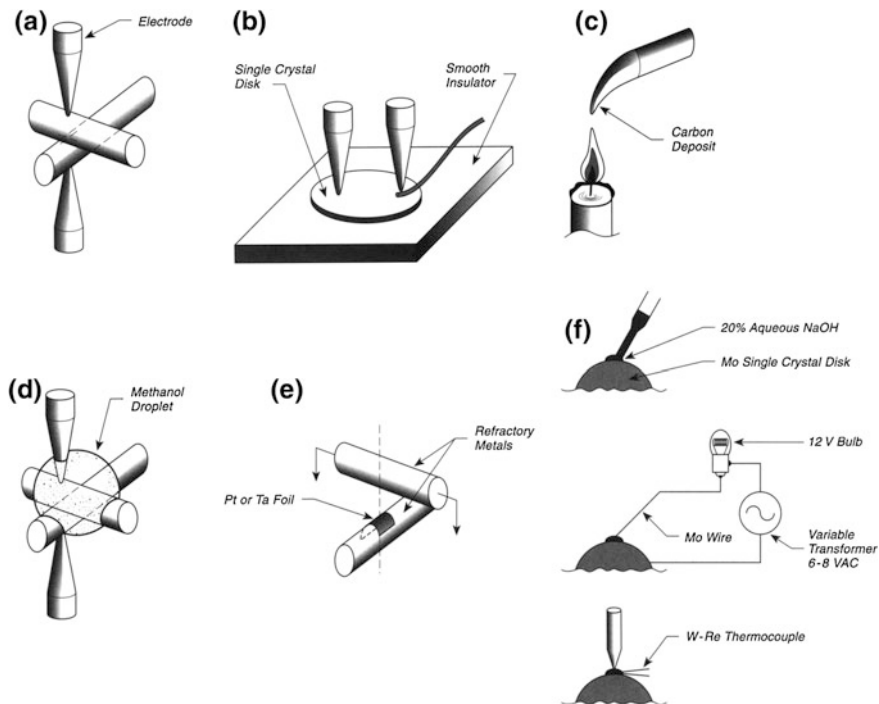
Spot-welding difficult junctions. a Point contact weld. b Welding to single crystal. c Preventing electrode sticking. d Welding under methanol. e Sandwich weld between refractory metals. f In situ electropolishing+welding
